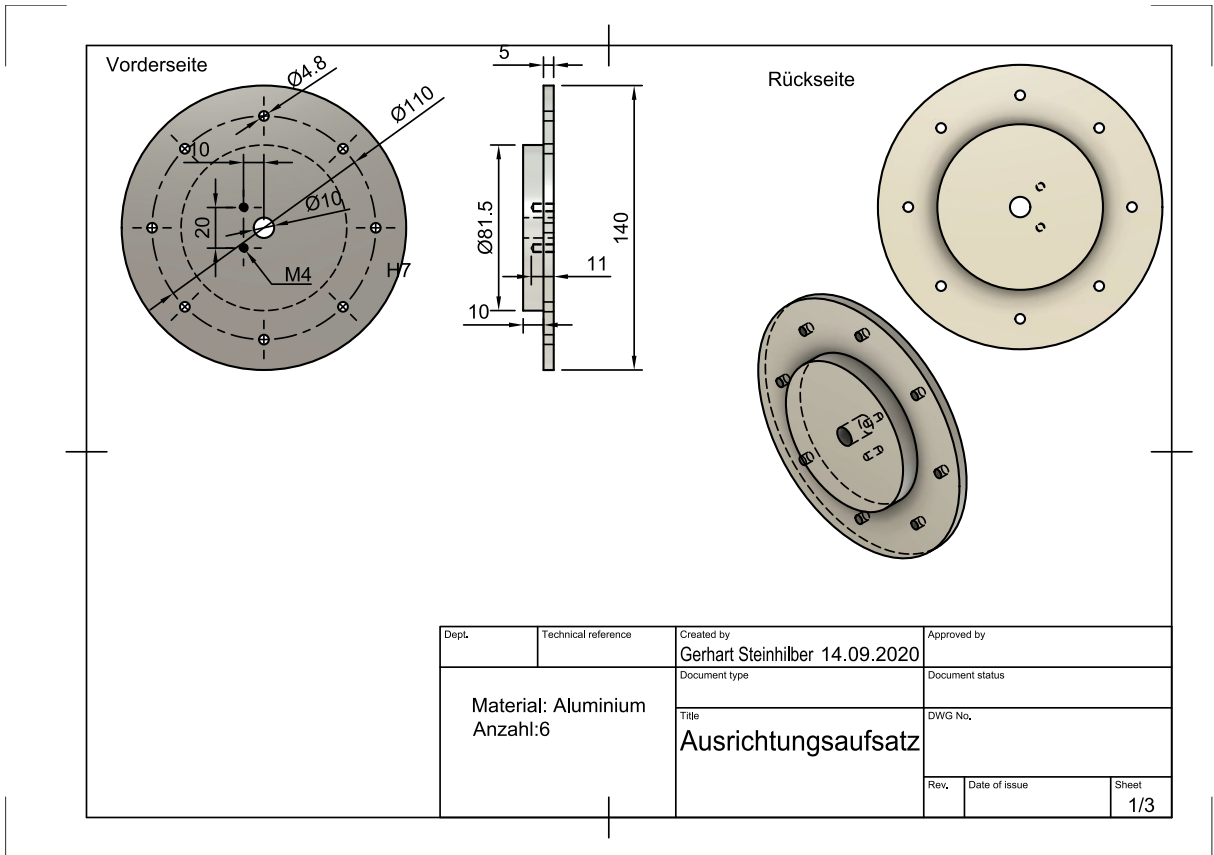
Technical drawing of the attachment for alignment of LaBr₃:Ce detectors.
